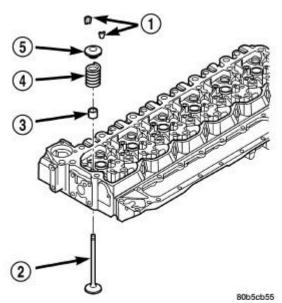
Valve Assembly Configuration Courtesy of CHRYSLER GROUP, LLC
